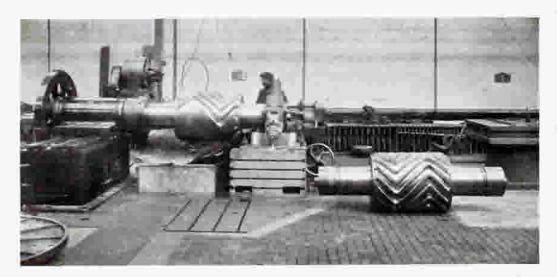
The cutting of a 3-ton Citroen Rolling Mill Pinim.
